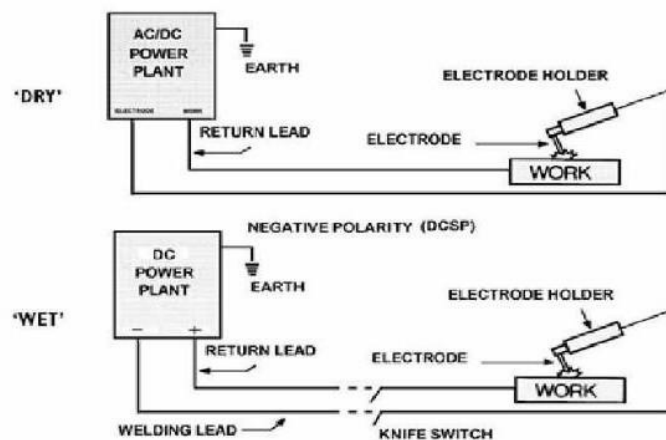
Systematic Diagrams of Dry and Wet Welding Process (Sundarapandiyan
